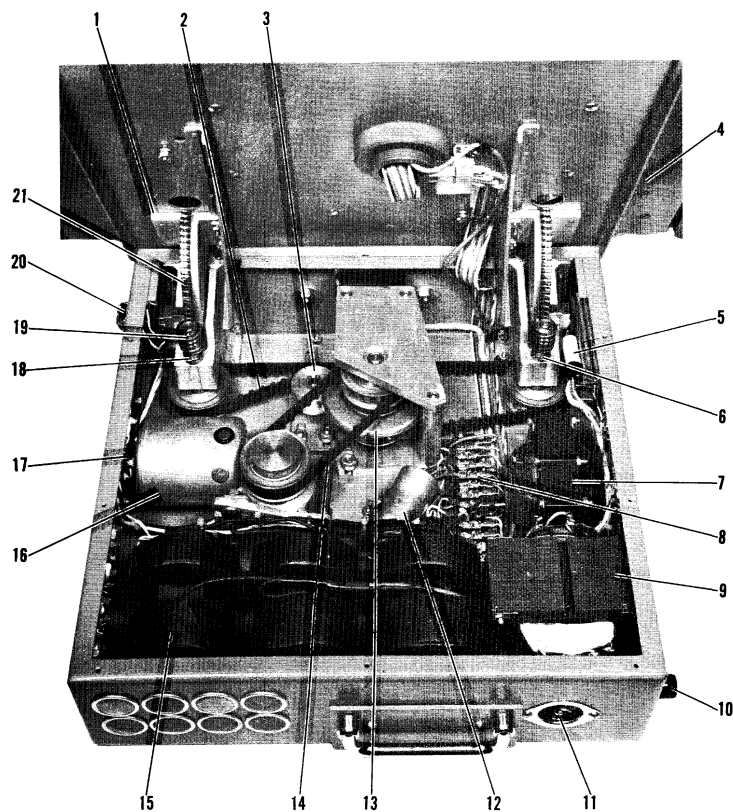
Advanced Light Table, Lower Light Box Assembly
